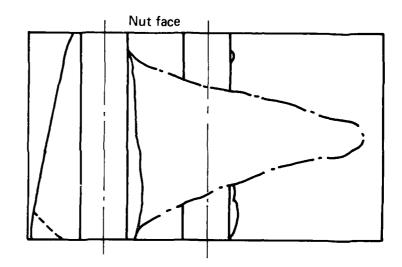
(b) FRACTURE SURFACES: SPECIMENS TYPE (C)
